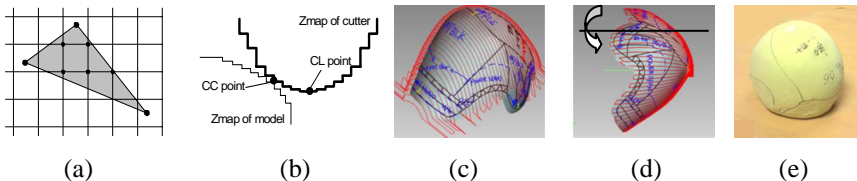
(a)&(b) Tool-path generation algorithm using Z-map (c) Generated tool-paths for 3-axis machining (d) Generated tool-paths for 4-axis machining (e) A duplicated polyurethane foam after machining
